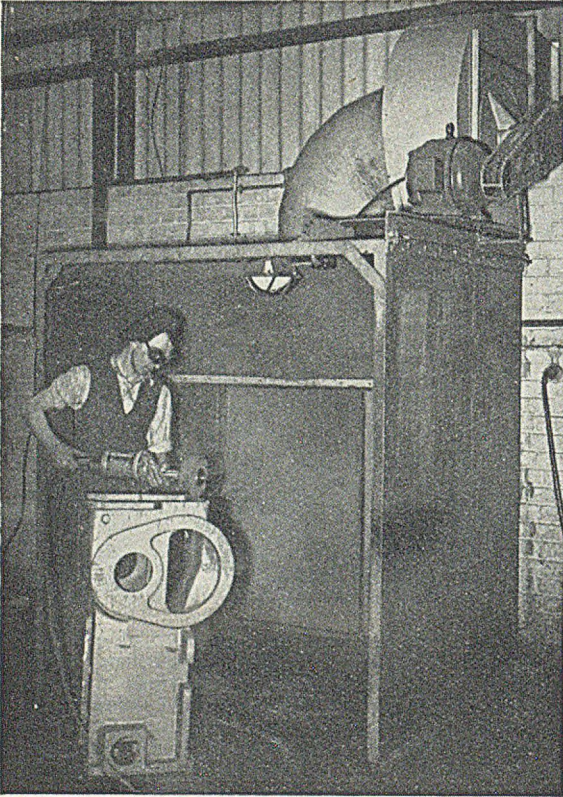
FETTLING CABIN USED FOR EXHAUSTING DUST FROM PORTABLE GRINDERS. THE CASTING STANDS ON A TURNTABLE AND GRIT FROM THE WHEEL IS THROWN TOWARD THE REAR OF THE CABIN.
